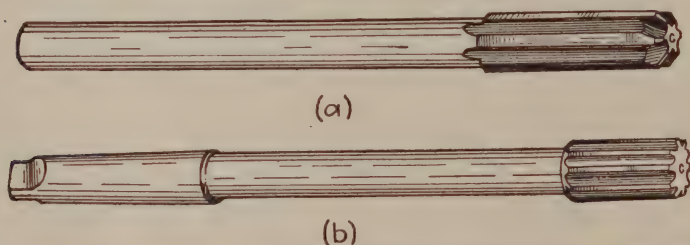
Machine reamers. (a) Straight-shank rose reamer; (b) taper-shank fluted reamer.
